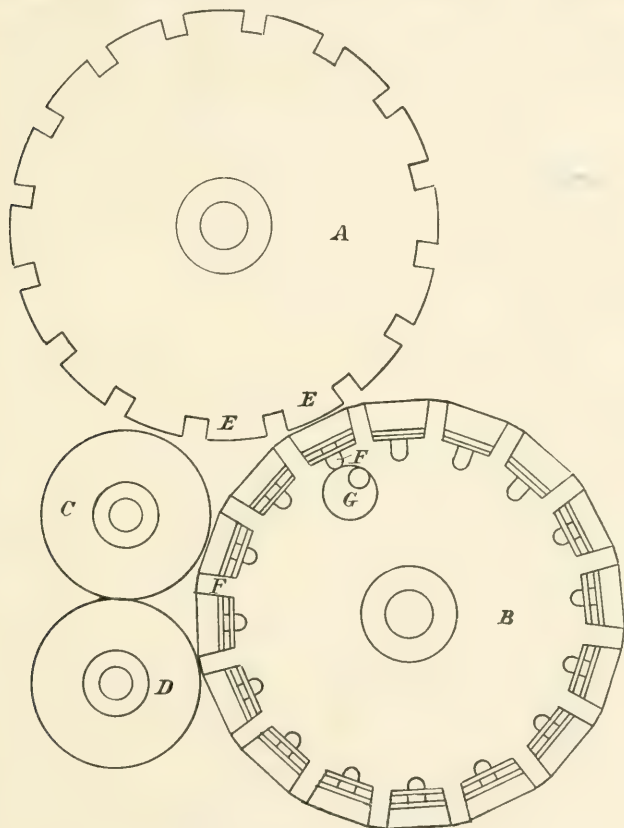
Professor Siemen's Peat-moulding Machine.
